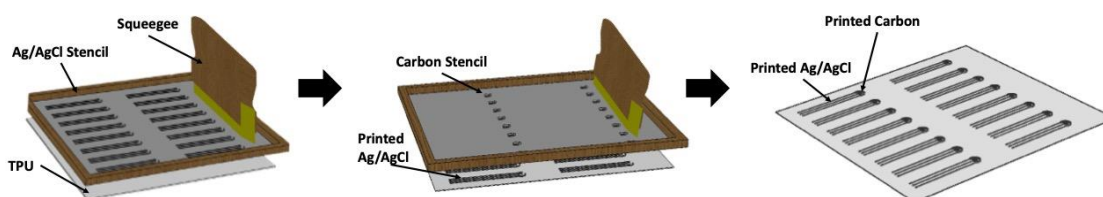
Schematic illustration of the flexible sensor fabrication process using the screen-printing technique. Flexible inks (Ag//AgCl and carbon) were sequentially screen-printed and cured onto the TPU substrate. To define the electrode area, the printed electrodes were encapsulated with a TPU layer resulting in the complete flexible sensor construct.
